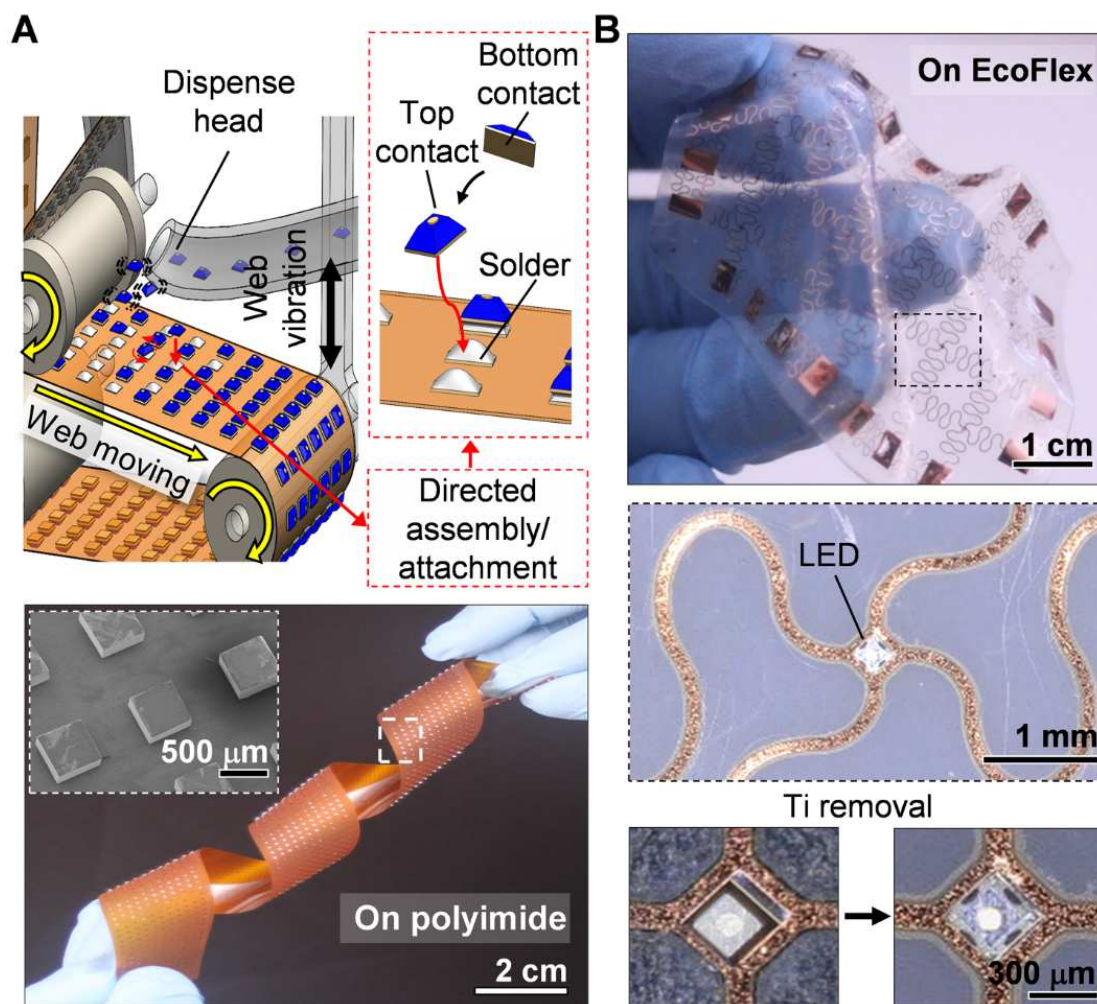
Chip attachment using roll-to-roll fluidic assembly and photographs of the resulting structures. (A) The application and assembly of the chips is achieved using localized application using a dispensing head and directed assembly using surface tension-driven assembly [103]. The molten solder bumps have a high surface energy which leads to the attachment and alignment of the chips and the formation of an electrical contact to the anode of chips. Results of assembled chips with a high density (bottom left) and a low area density (right) are shown. A 100 nm thick Ti layer is used as an anti-solder wetting layer to ensure correct right-side-up (negative terminal facing up) LED assembly; this Ti layer is removed in 45 second Ti etch (B, bottom) prior to the lamination of the stretchable top contact.
